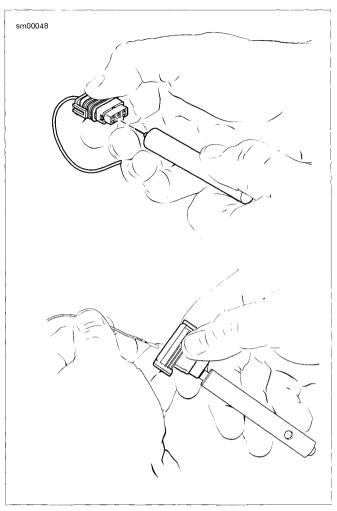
Packard Micro 64 Connector: Insert Tool and Remove Terminal
